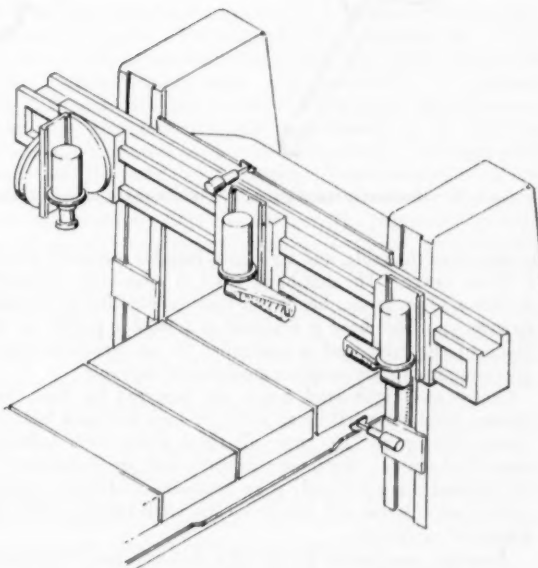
SKIN-MILL CUTTING-HEAD AND TRACING-UNIT RELATIONSHIP
